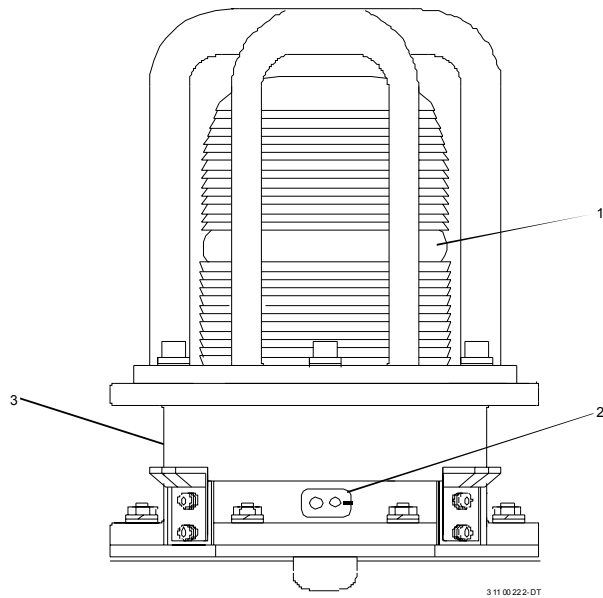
Kill Status Indicator (KSI) Assembly.
